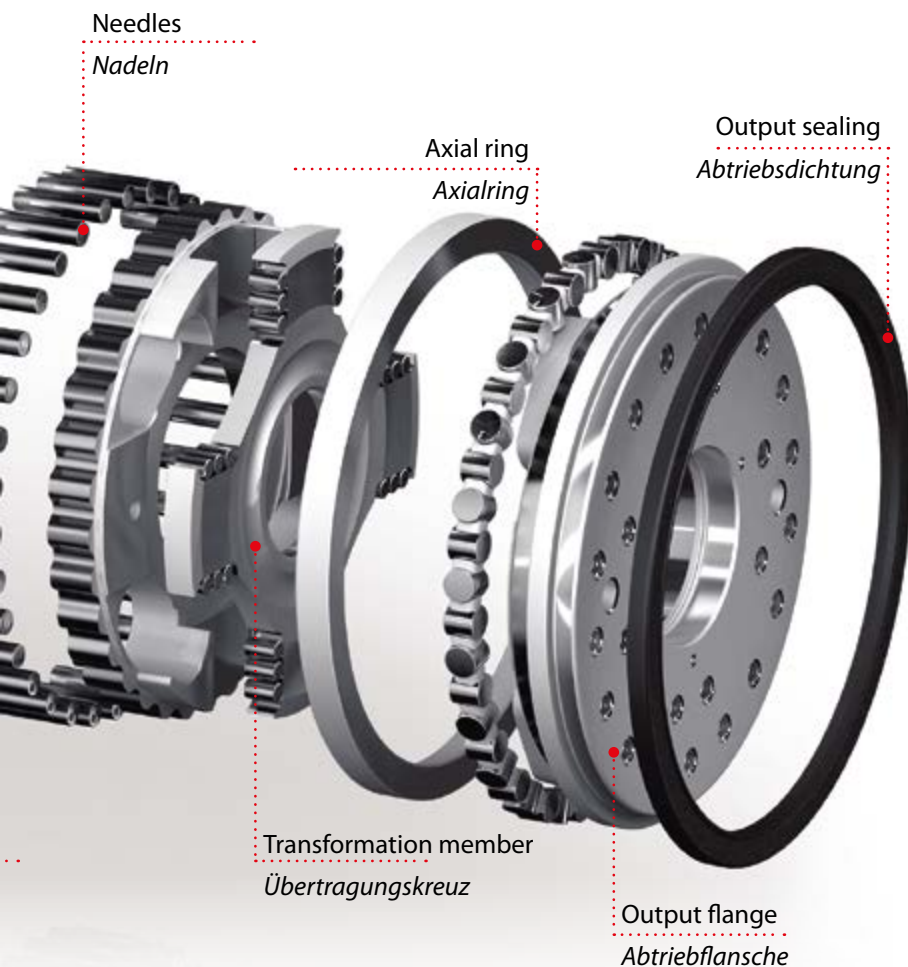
TwinSpin reduction gears components | *Getriebe Komponenten TwinSpin
